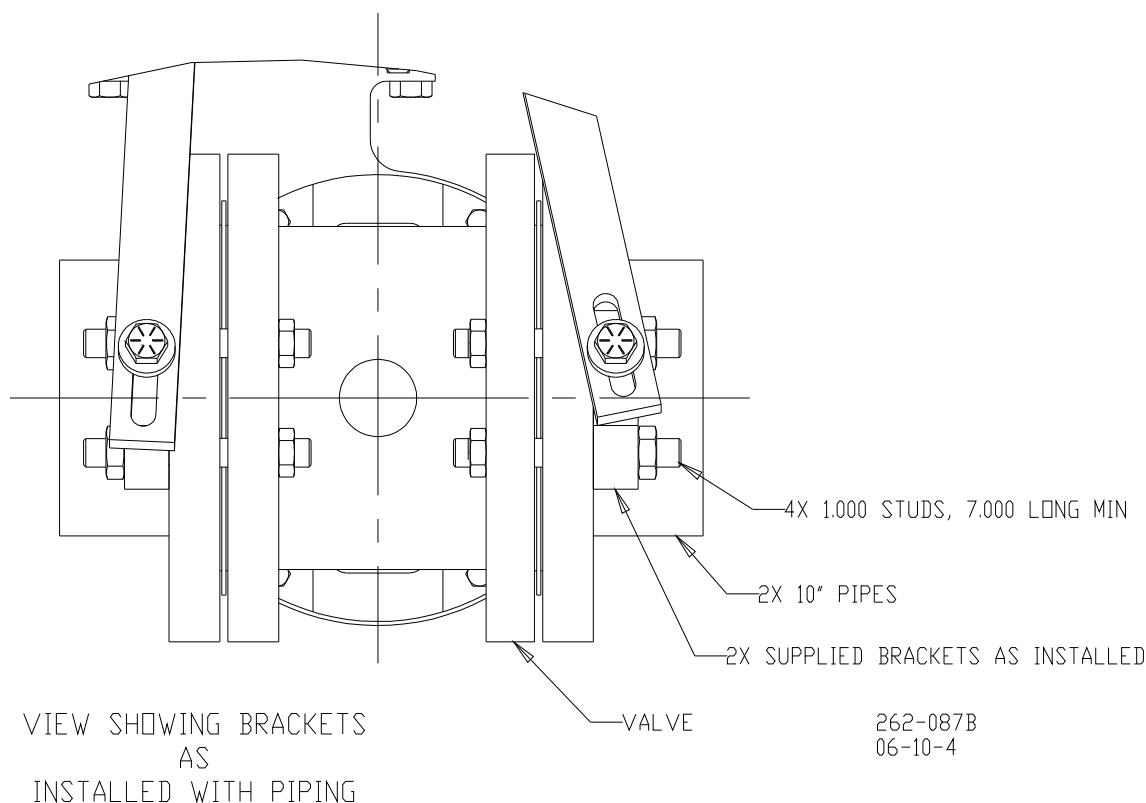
Close-up of Strut Brackets on Pipe Flanges
